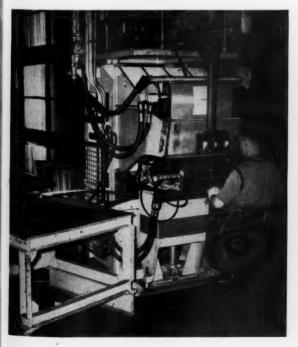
The end of the line. A door leaving the clinch press for the final welding machine
